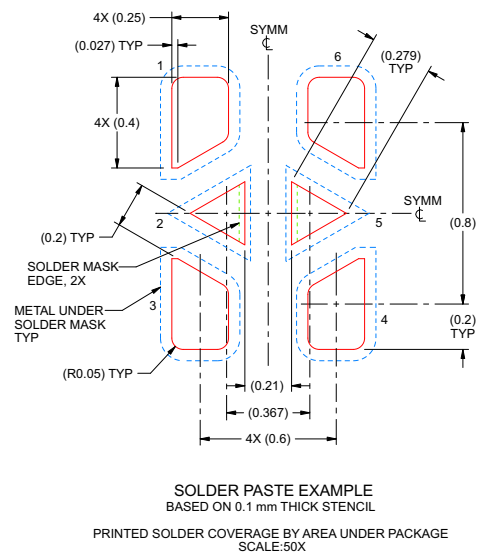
X2SON-6 (DTB) Package Solder Stencil Example
